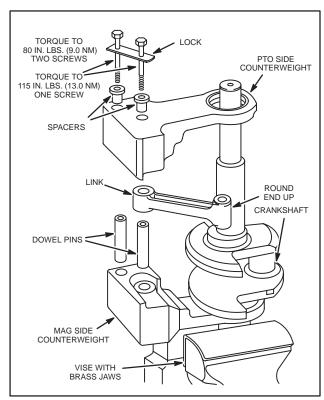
ASSEMBLING COUNTERWEIGHT TO CRANKSHAFT
